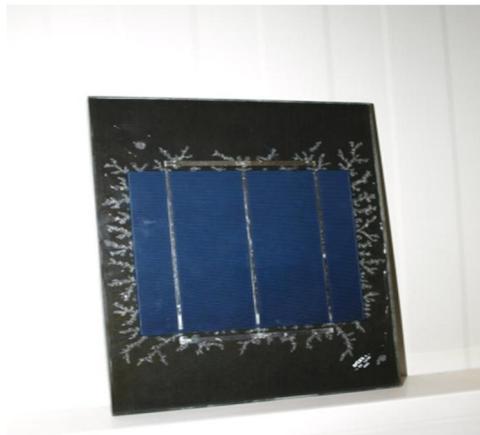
PV façade with bubbles due to the outgassing of the façade plate
